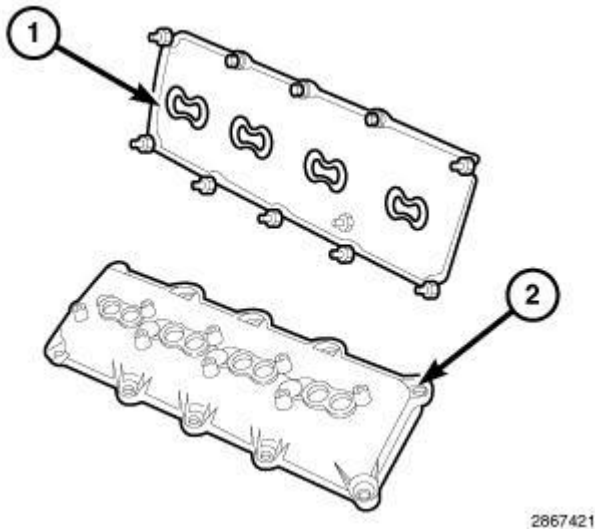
Cylinder Head Cover Gasket & Cylinder Head Cover
